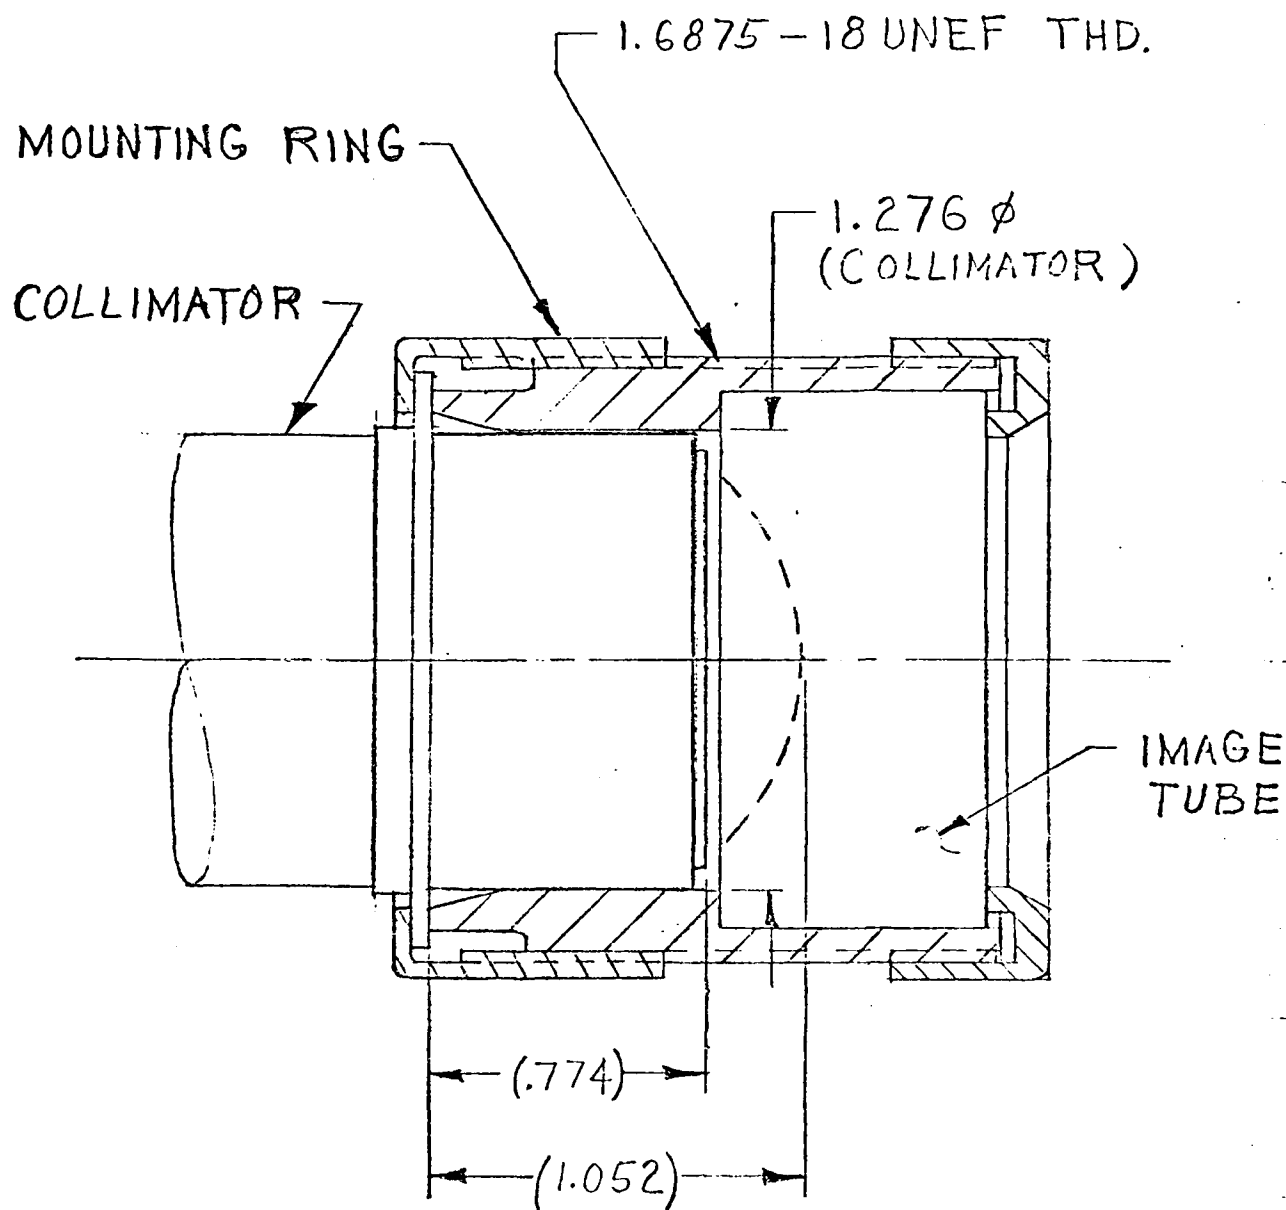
Interface Dimensions - 25mm Wide Angle Cyclops Eyepiece
